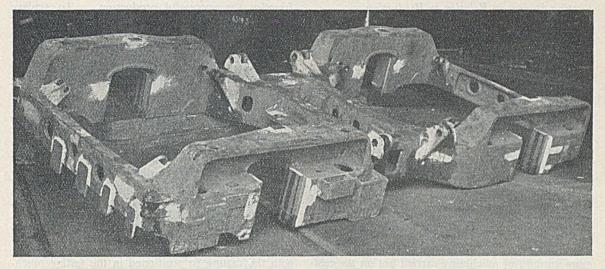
Cast-steel Bogic Frame which Replaced a Welded Assembly. It weighs 2 tons and has an average Metal Thickness of  $\frac{7}{5}$  in.
